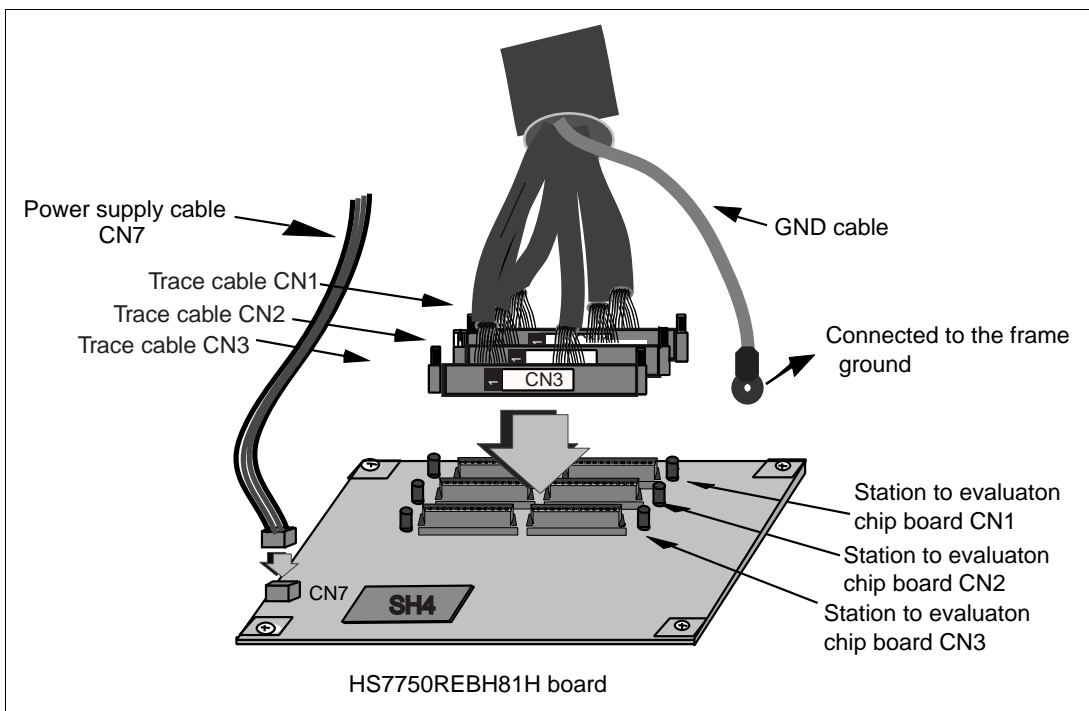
Connecting the Trace Cables to the Evaluation Chip Board
